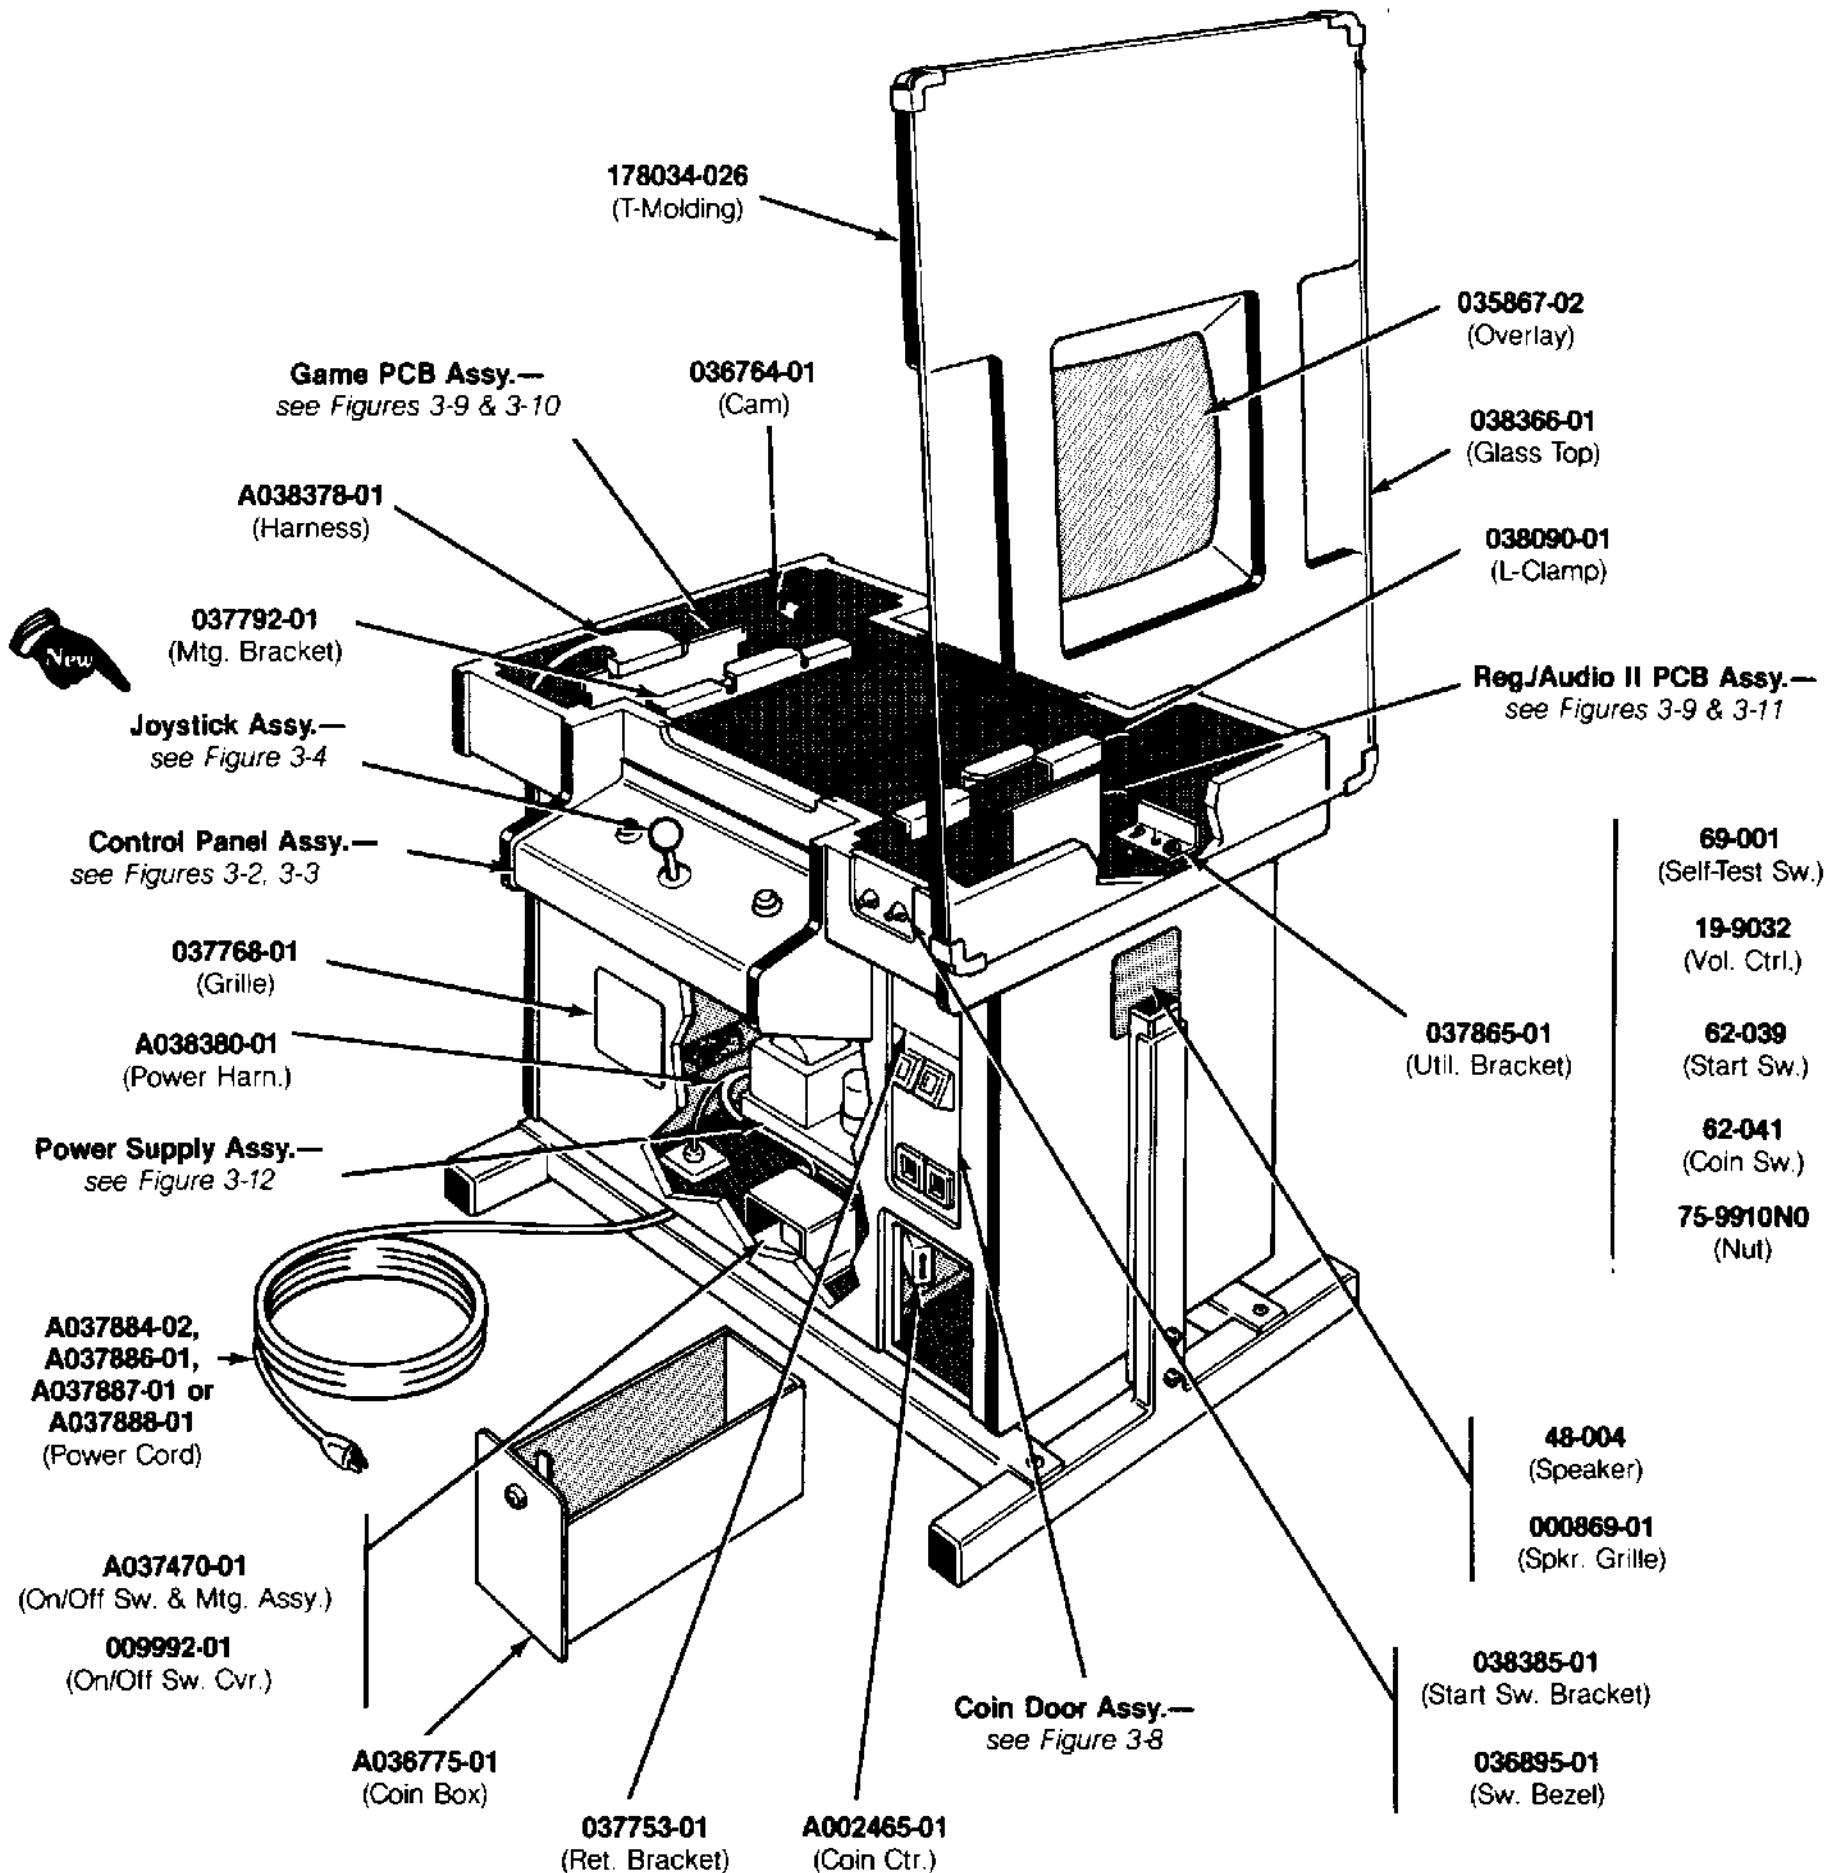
Cabinet-Mounted Assemblies, continued Cabaret Cabinet Parts List
